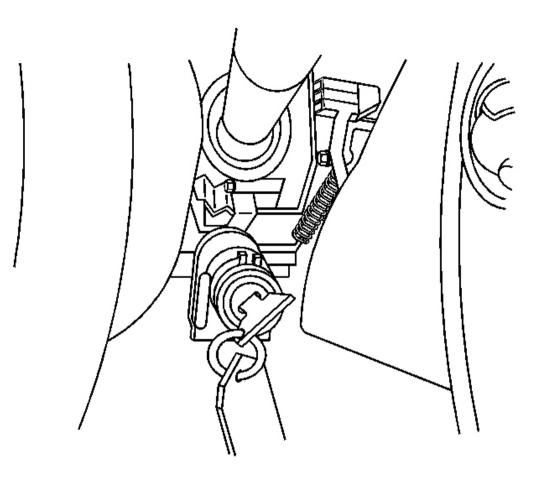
Key & Ignition Lock Cylinder Courtesy of GENERAL MOTORS CORP.
